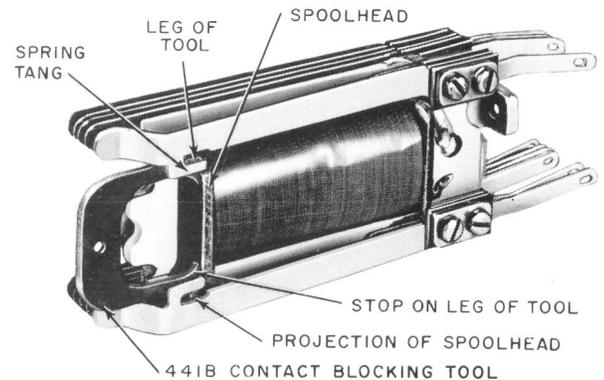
Blocking EA41 Relay for Cutover Purposes
